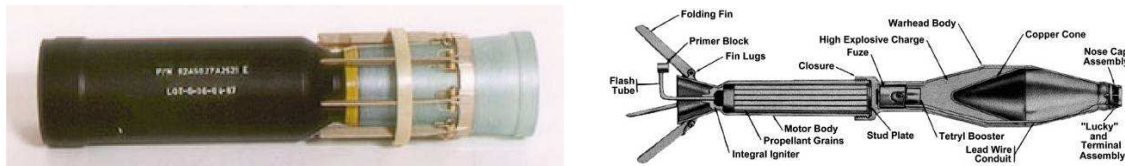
Rocket motor B-300 [3] (left), rocket 66 mm M72 LAW [17] (right)
